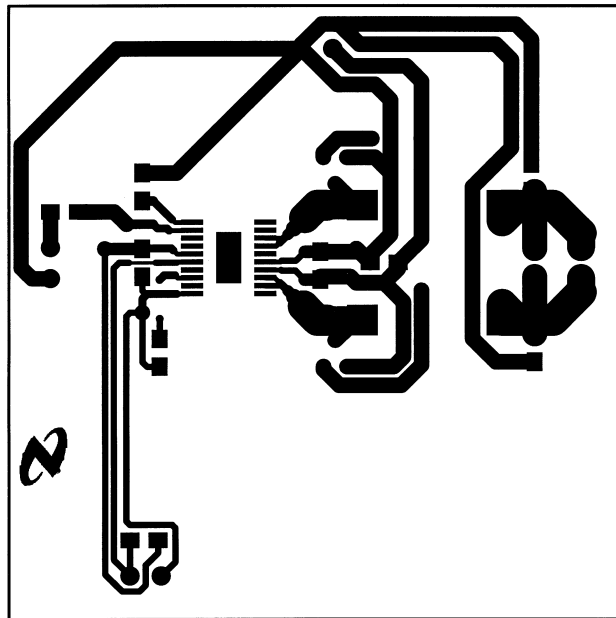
through 4 show the recommended two-layer PC board layout that is optimized for the 14-pin MH-packaged LM4668 and associated external components. Figures 5 through 7 show the recommended two-layer PC board layout that is optimized for the 14-pin LD-packaged LM4668 and associated external components. These circuits are designed for use with an external 12V supply and 8Ω speakers (or load resistors). This circuit board is easy to use. Apply 12V and ground to the board's V_{DD} and GND terminals, respectively. Connect speakers (or load resistors) between the board's -OUT and +OUT terminals. Apply the input signal to the input pin labeled -IN.
